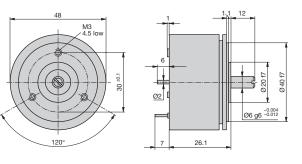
KINAX 3W2 with special drive shaft at front and at rear. At front: Ø 6 mm, length 12 mm. At rear: Ø 2 mm, length 6 mm
